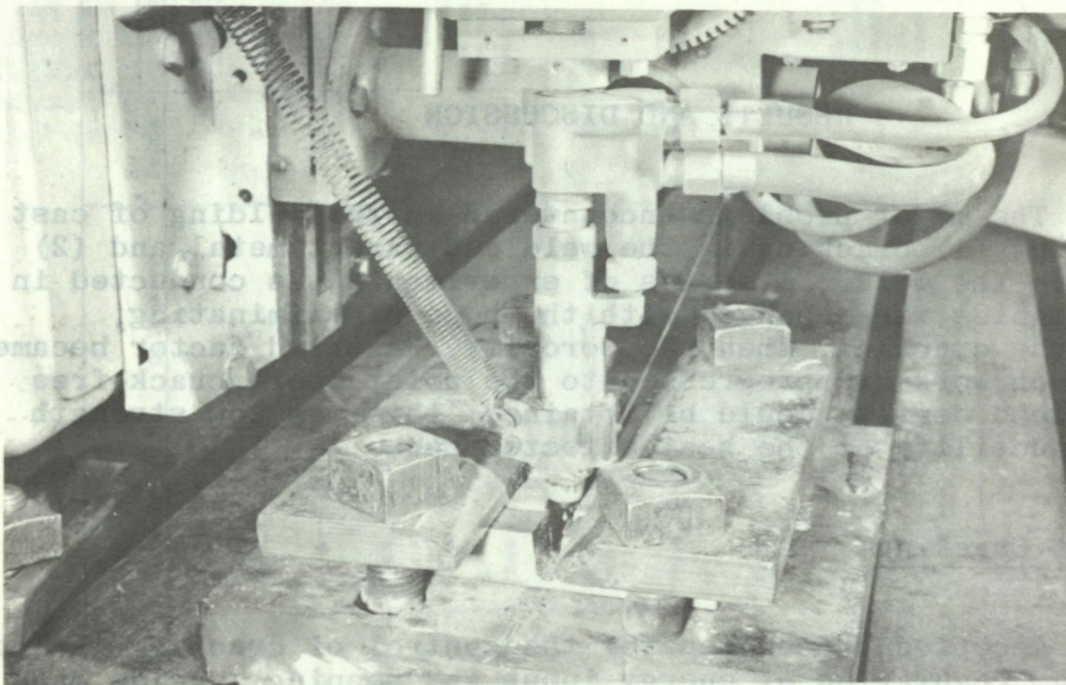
Close-up View Showing Jigging and Cold Wire Feed.
